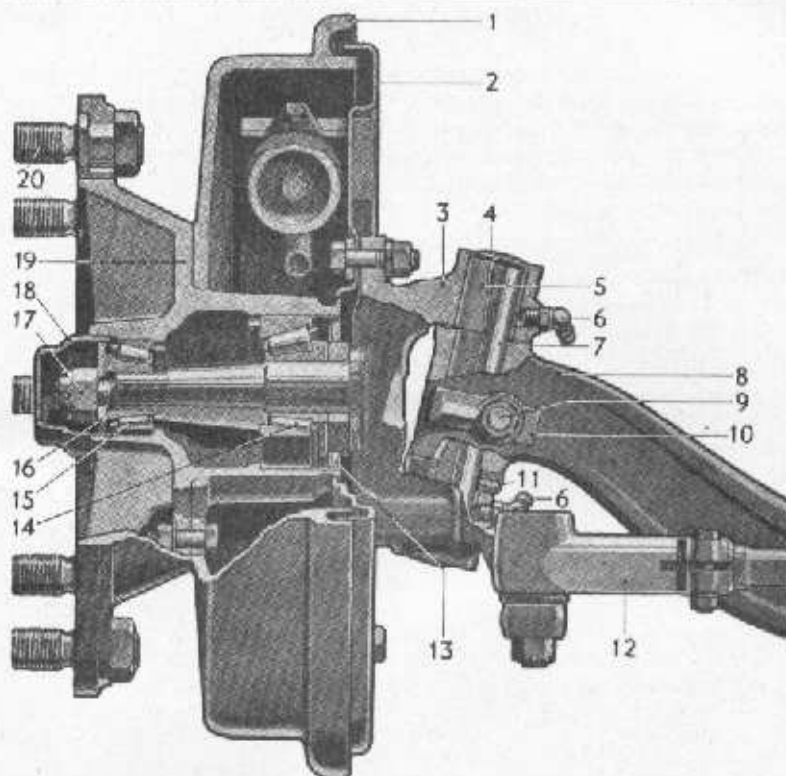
Sectioned drawing of front hub and steering knuckle.
